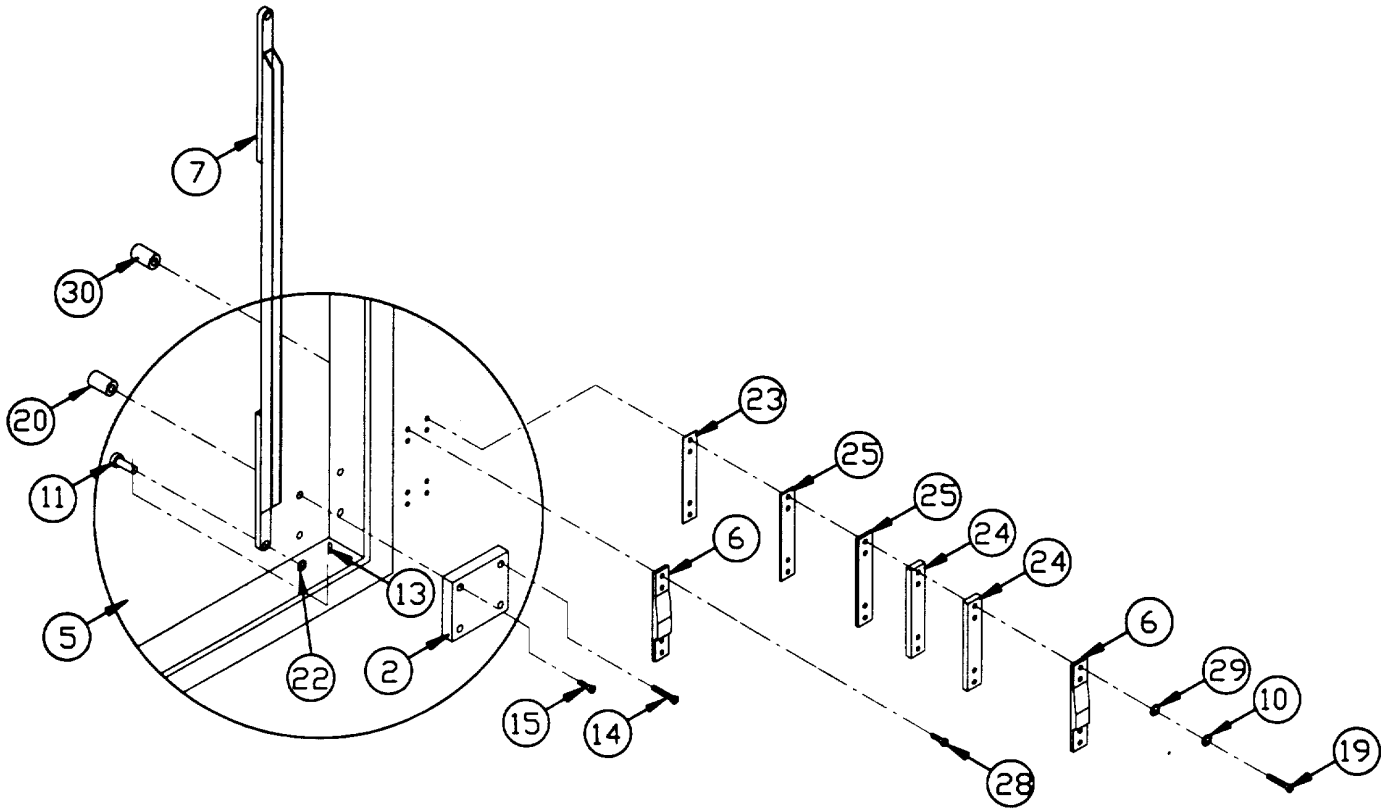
DOOR ASSEMBLY (SHEET 3 OF 5)
